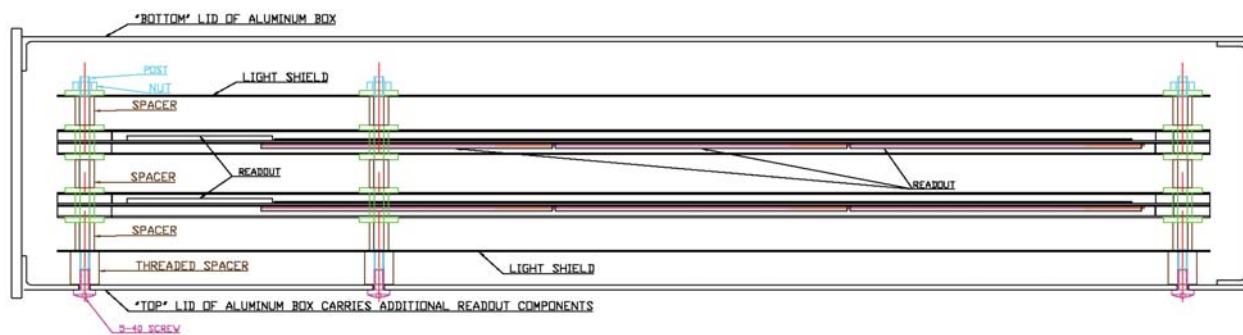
Side-view mechanical drawing of one full detector assembly. Shown are the outer enclosure and two stacked *X–Y* planes edge-on. Their vertical spacing will be about 20 mm. Two such assemblies will be produced.
